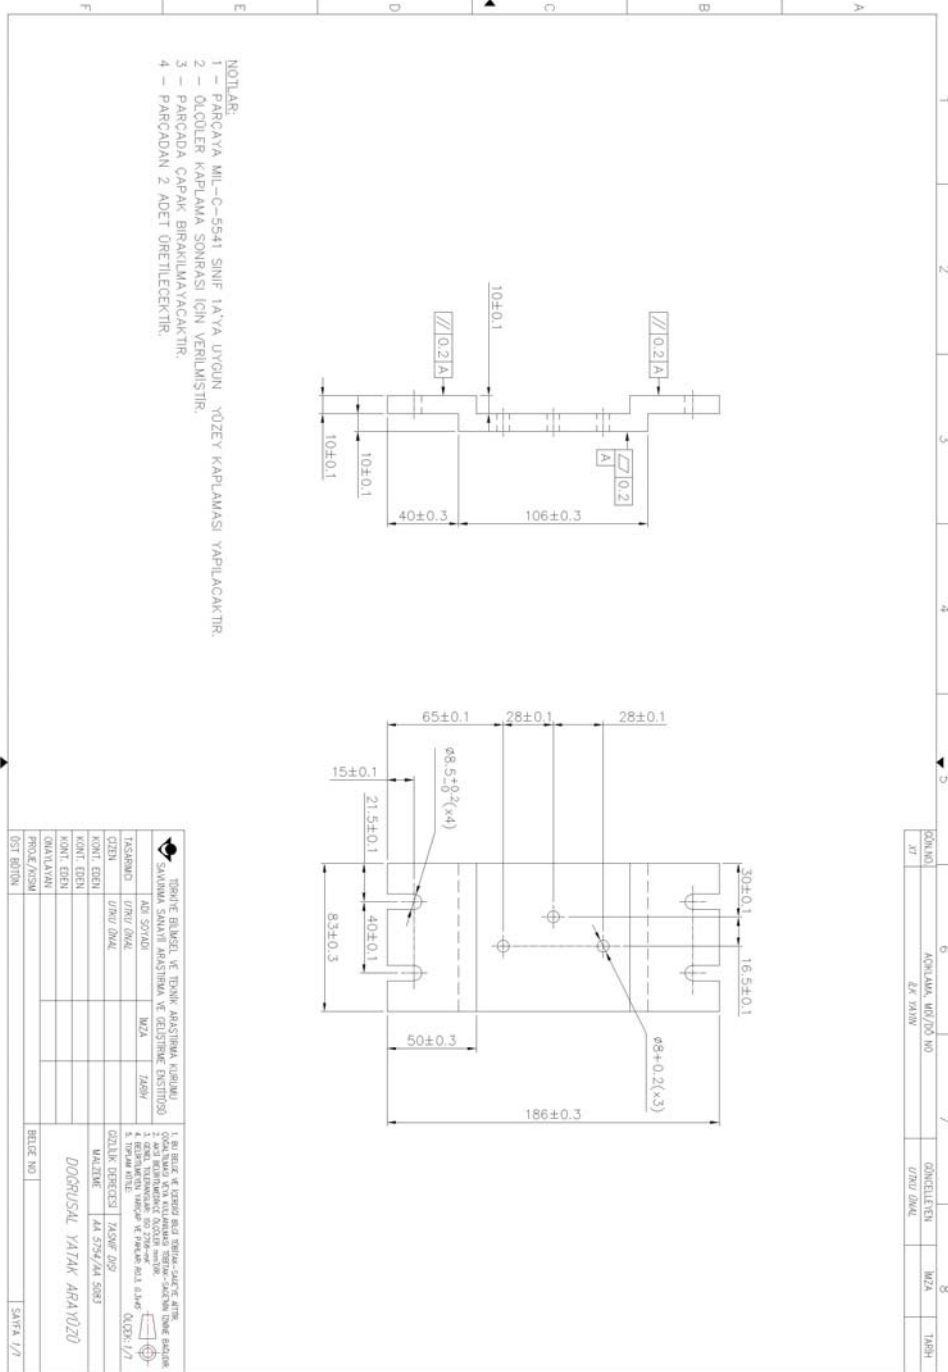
3: Technical drawing of the linear guide interfaces.
